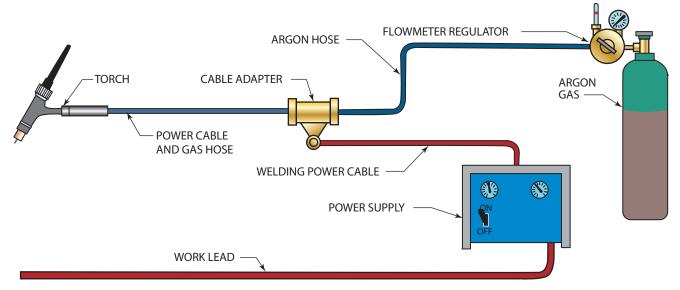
Schematic of a GTA welding setup with an air-cooled torch.
